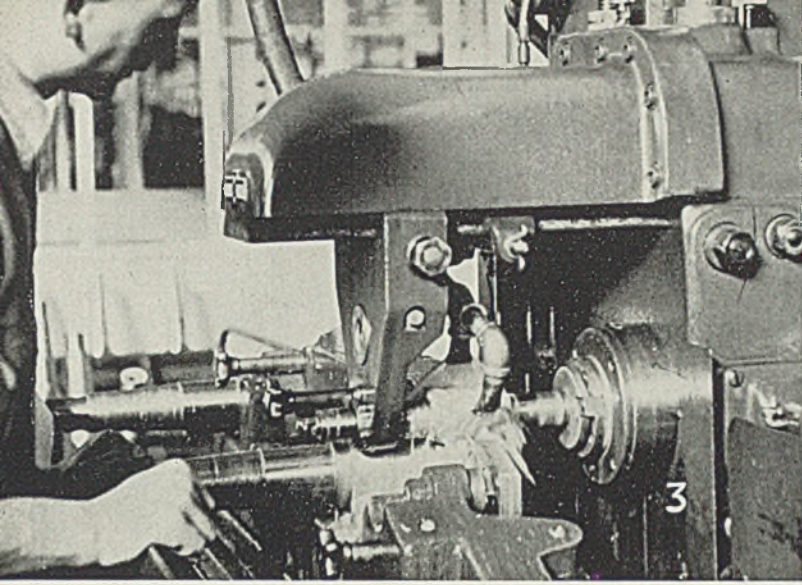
Taking first or rough turn on front section of shaft. Six surfaces are turned simultaneously by the multiple tooling setup employed on this LeBlonde automatic lathe. Fig. 2—The six tools on the turret of this special Potter & Johnson automatic lathe face, bore, drill the core, form, ream and center the front section of the crankshaft in a series of fast precise operations. Note locating sleeve at top of each tool holder on the spindle to steady the tool while it is working. Fig. 3—a templet is used in milling the profile of cheek side of the front section in this Cincinnati Hydra-Matic milling machine. Fig. 4—Here the rear section is seen mounted in a jig which is moved in succession under each of the three spindles of this multiple-spindle drill press for making the oil holes. At first station, holes are drilled; reamed at second station; counterbored at third. Drill reamer and counterbore with operating levers for each can be seen. Fig. 5—Final detail inspection, rear section. Note precision gages employed, including "go-no-go" gages
